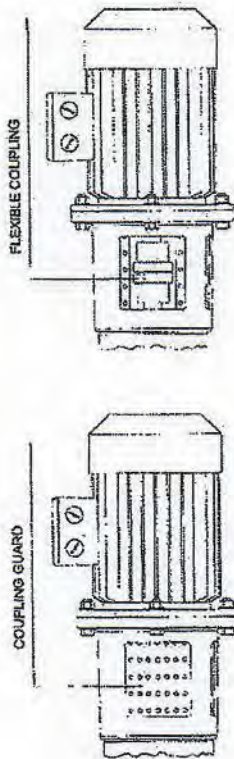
CHECKING THE ALIGNMENT ON MONOBLOCK DESIGN
